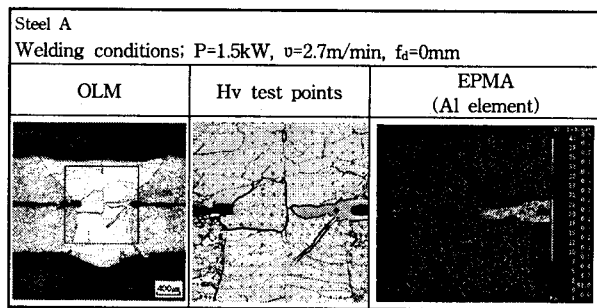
Weld cross-section showing Hv test points and EPMA analysis result
